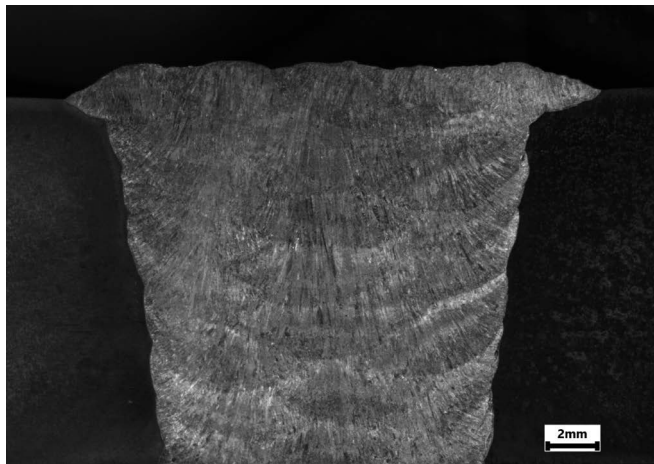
Macrograph image of cross-sectioned weld metal
